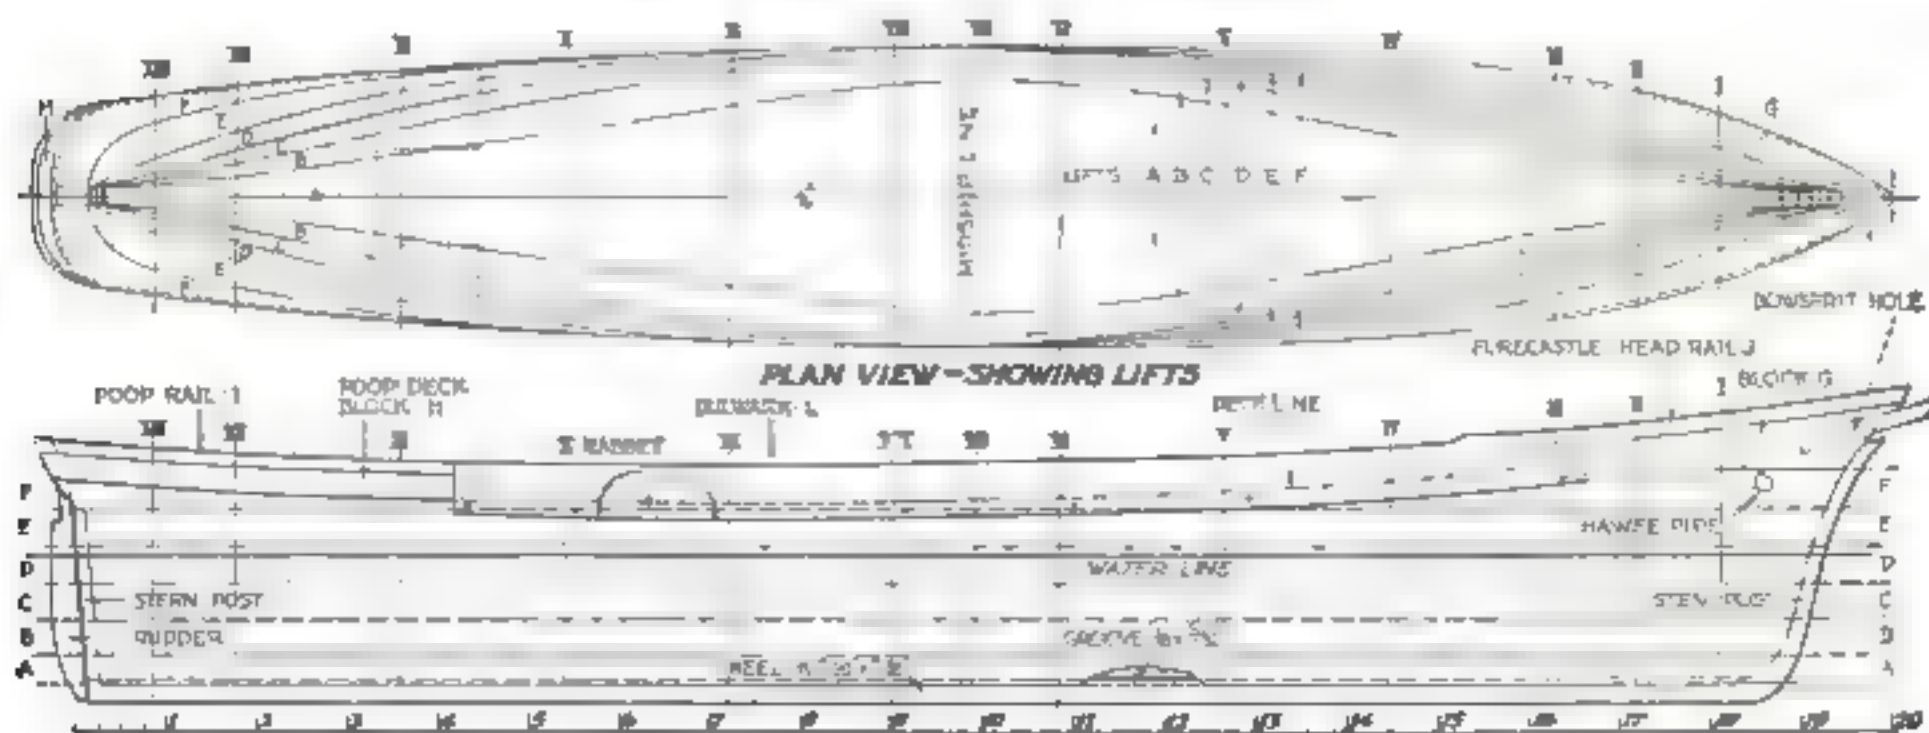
The hull of the model exactly one-third full size. A complete set of full-size drawings—hull, rigging and details—can be obtained by
